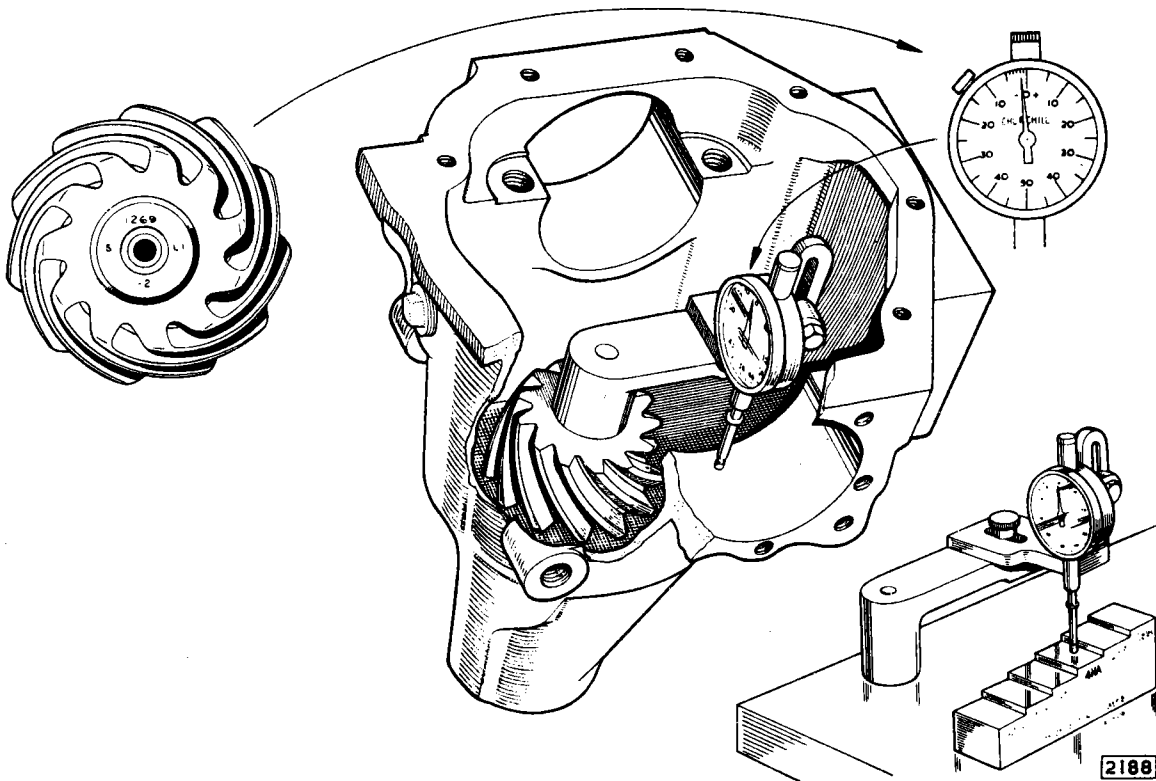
Checking the pinion cone setting using Churchill Tool No. SL 3. Note the pinion setting marks located on the end of the pinion.
